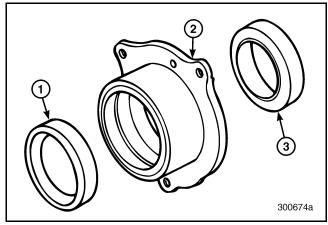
Exploded View of Front Countershaft Rear Bearing Cover
